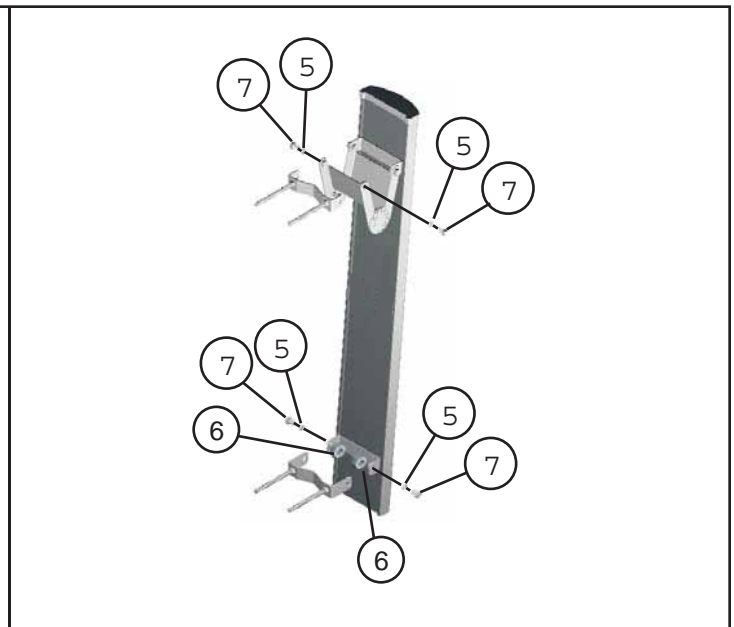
Fastening Upper and Lower Bracket Assemblies to Antenna.
